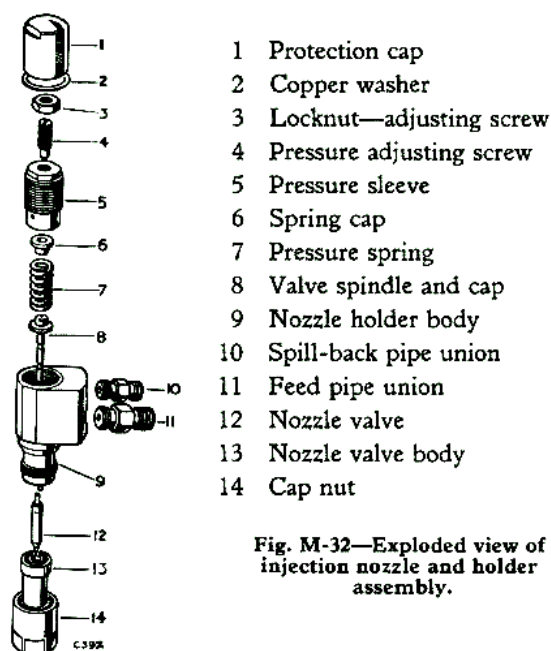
Exploded view of injection nozzle and holder assembly.
